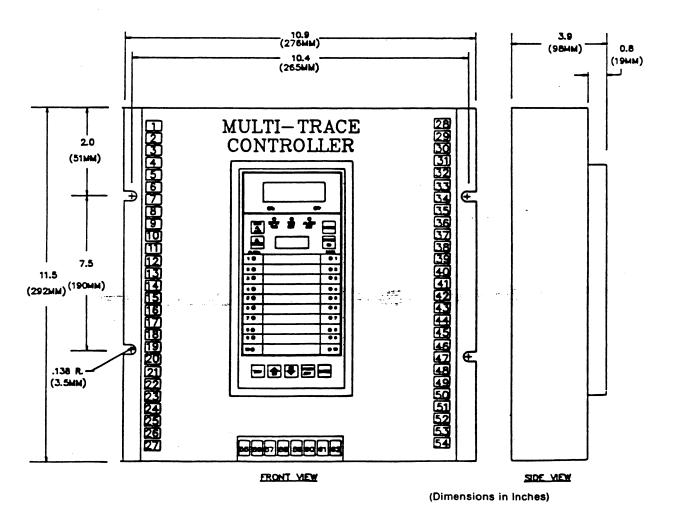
SUBPANEL MOUNTING DIMENSIONS
